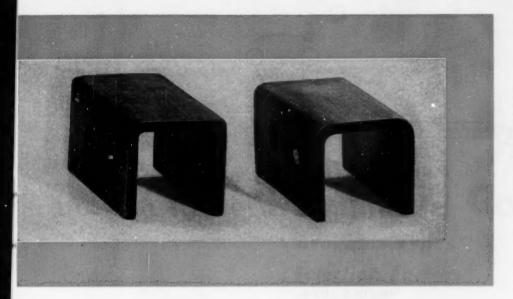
Small design change (inside radius changed from 1/16 to 3/32 in.) on shield for circuit-breaker arm permits part to be postformed from sheet, right, instead of being cut from laminate tube, left. A desirable toe-in of the sides is also incorporated into the postformed part.
